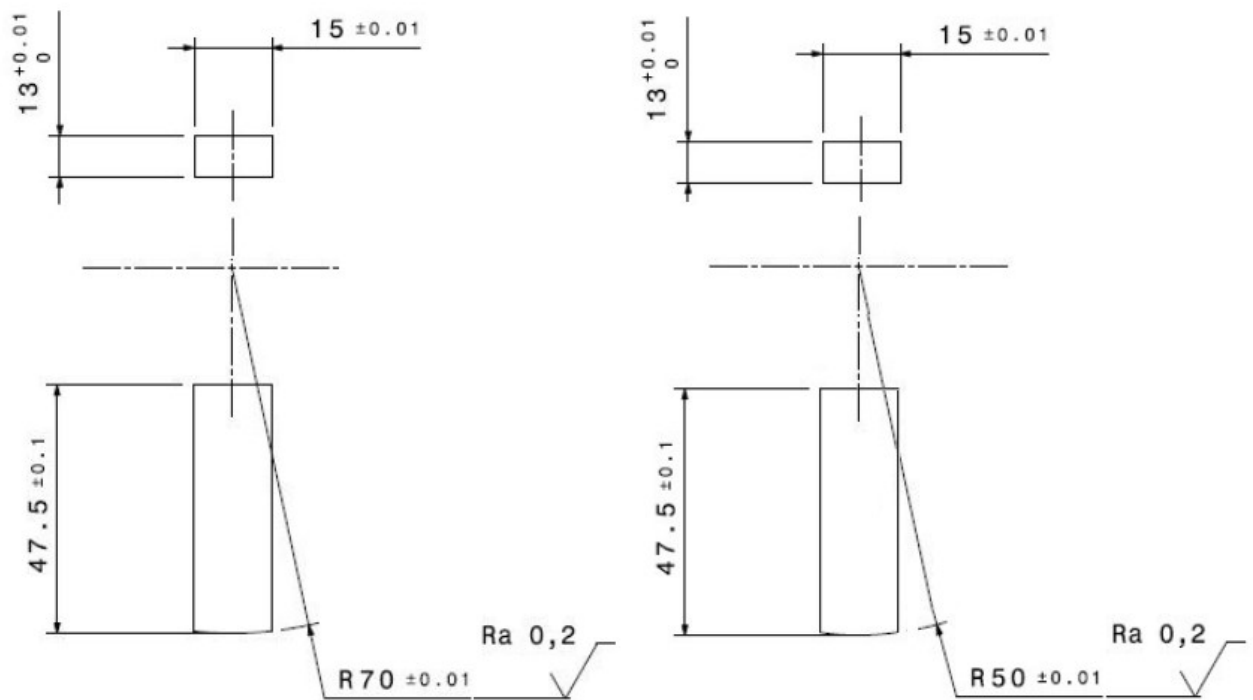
Fretting pads of the first group of tests (dimension in mm).
